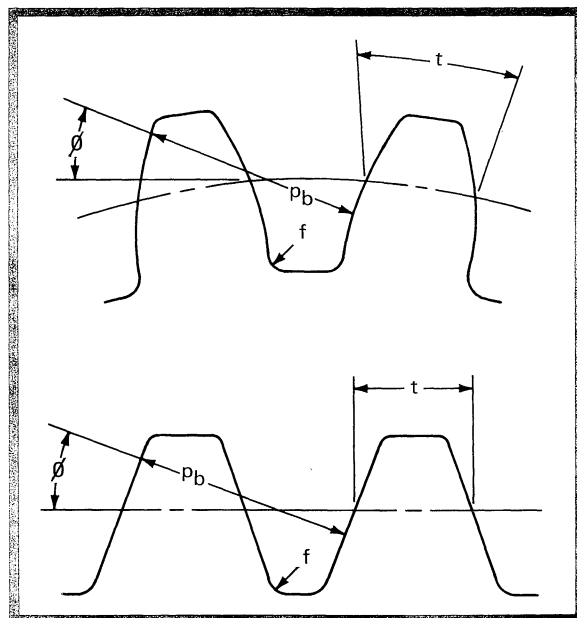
Since a circular involute gear is designed to the same parameters as the basic rack, it will roll freely with the basic rack and with any other circular gear using the same design system.
